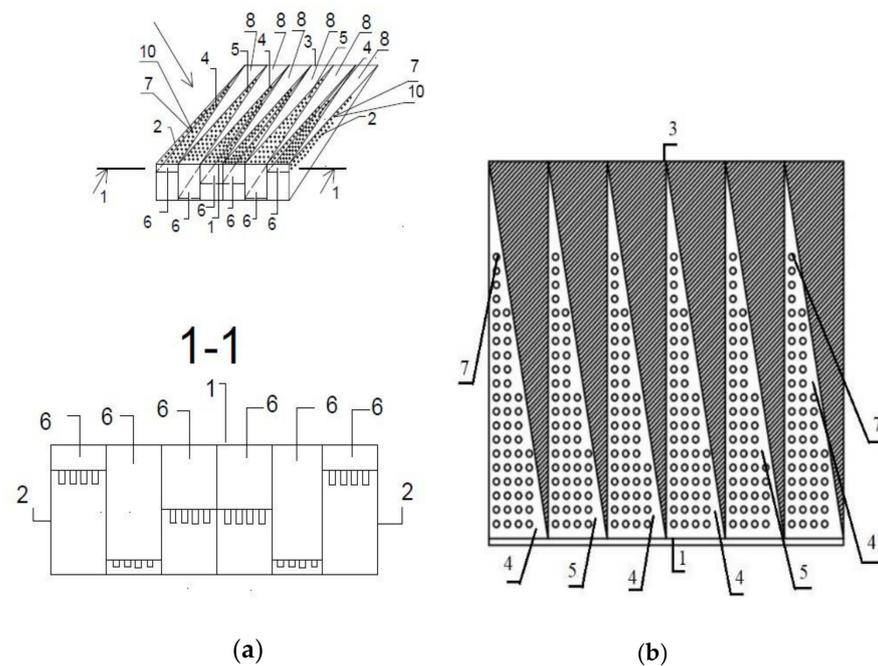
Acoustic diffuser: (a) top view; (b) exploded view.
